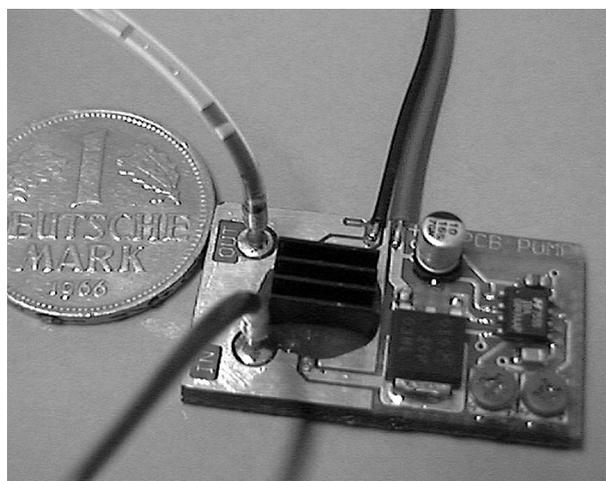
Photograph of a micropump with integrated electronics built in PCB technology.
